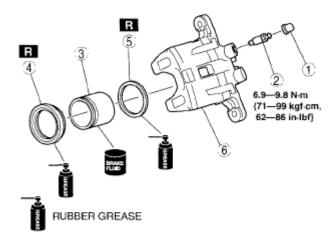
Identifying Disc Pad (Rear) & Torque Specifications Courtesy of MAZDA MOTORS CORP.
